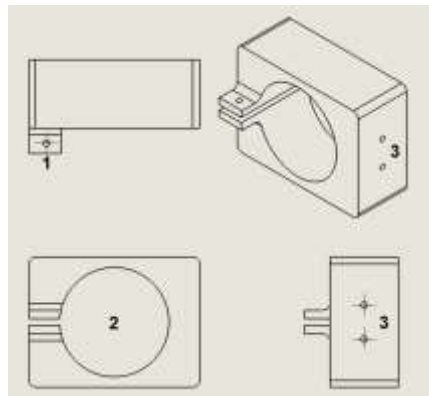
2D drawing of 1st iteration of motor holder
